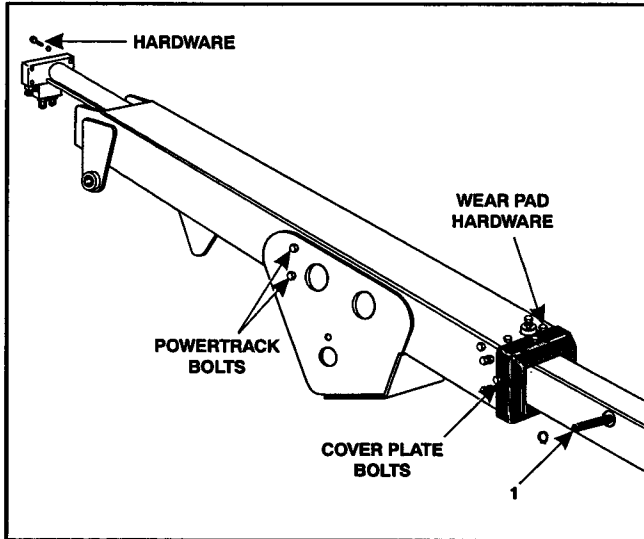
Location Of Components - Removal of Telescope Cylinder.
